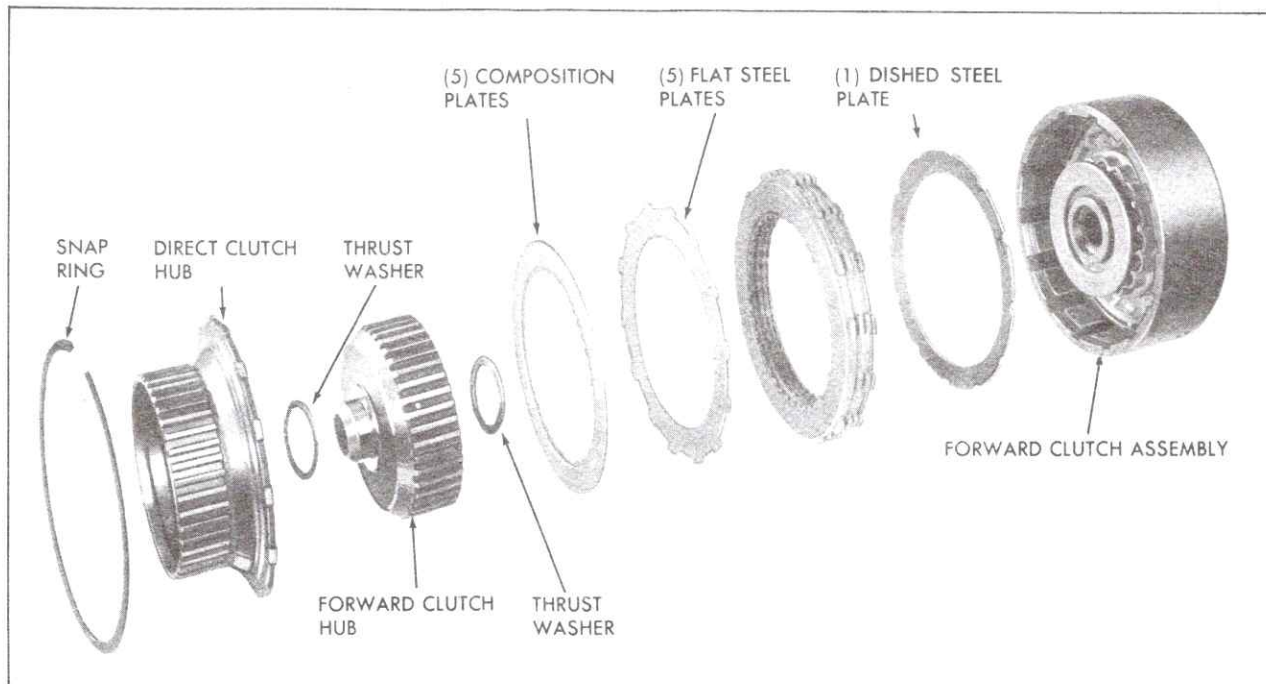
Forward Clutch and Forward and Direct Clutch Hubs Disassembled
